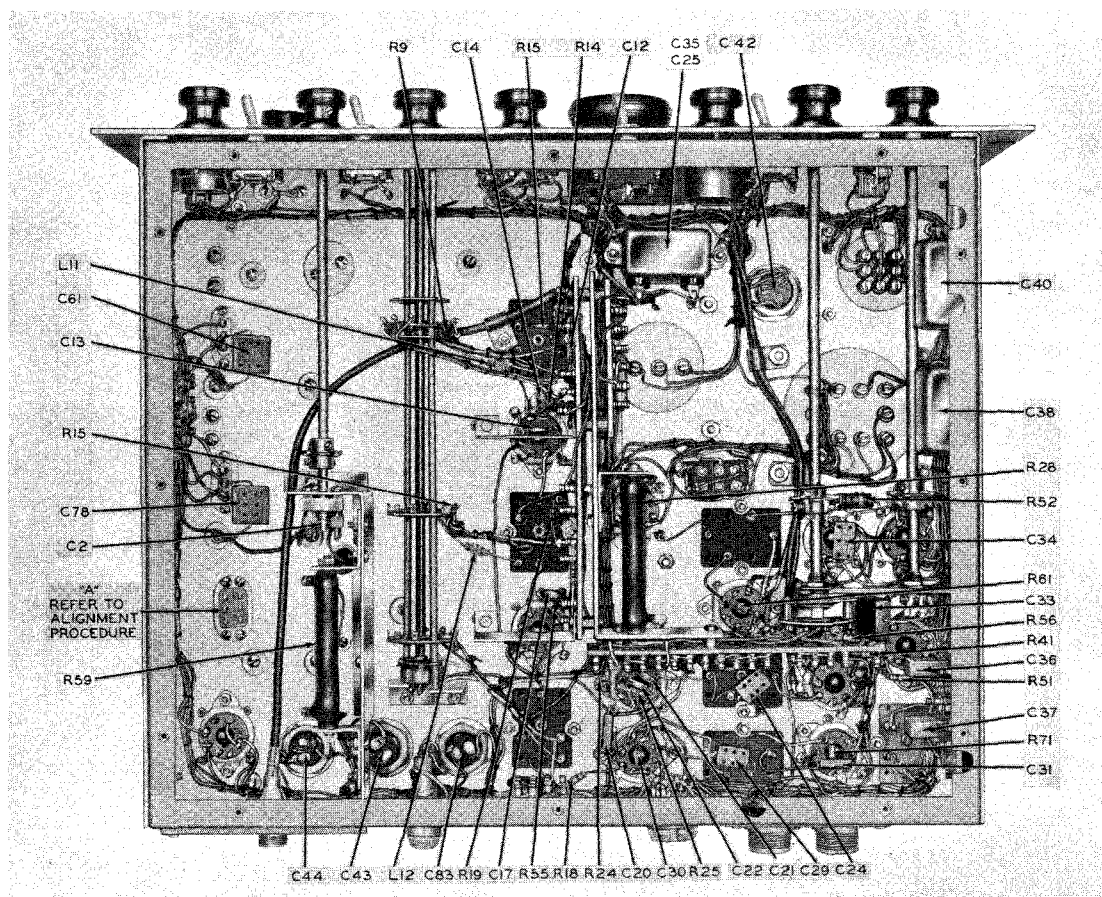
Radio Receiving Equipment Navy Model RBK-16, Bottom View Showing Component Parts.
